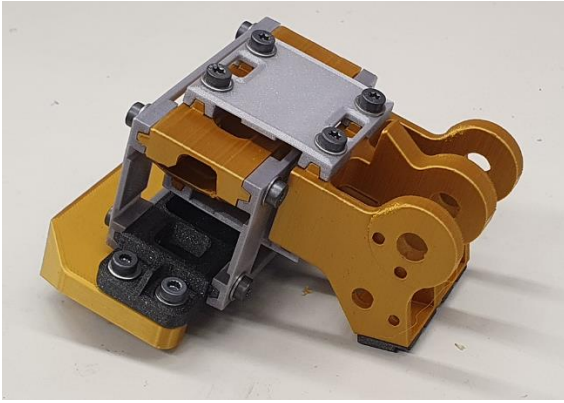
During the development of the flexjoint, 3D printing has been used frequently. The latest version of the flexjoint assembly is shown.
